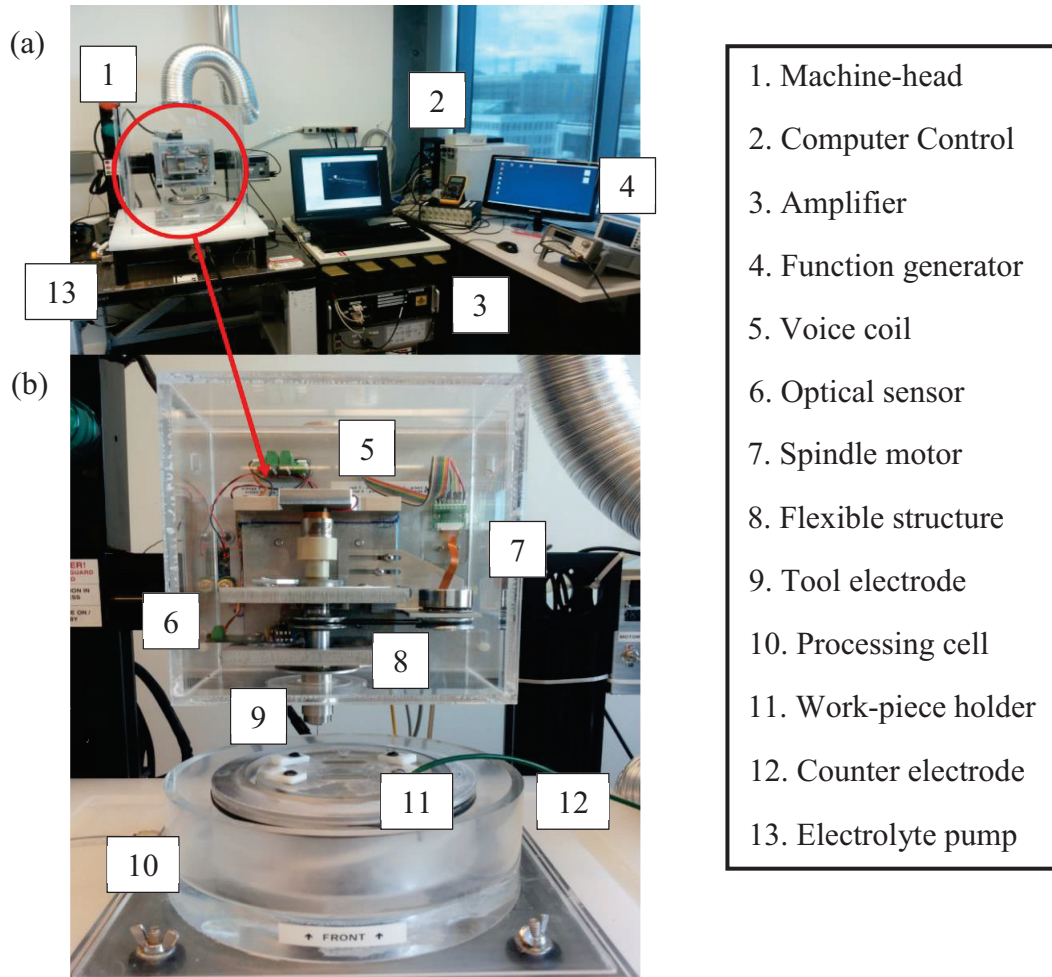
(a) SACE machining facility including the control computer, the circuit and the aeration system. (b) the SACE machine-head and the processing cell close-up. The machine-head with its optical sensor, voice coil, spindle motor and tool electrode is mounted on a Z axis and a flexible structure. The processing cell contains the counter electrode and the work-piece holder. The electrolyte level above the work-piece is maintained by an overflow. An outside cylinder container collects the overflow of electrolyte.
